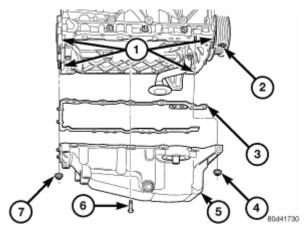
View Of Oil Pan, Gasket & Sealing Areas Courtesy of CHRYSLER LLC
